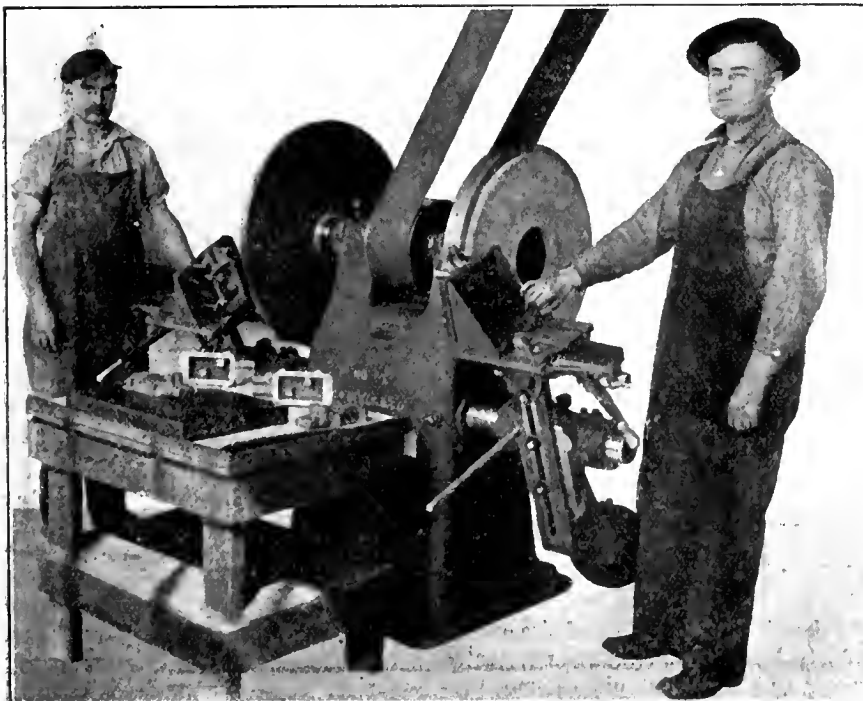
GRINDING SMALL MALLEABLE IRON CASTINGS.
